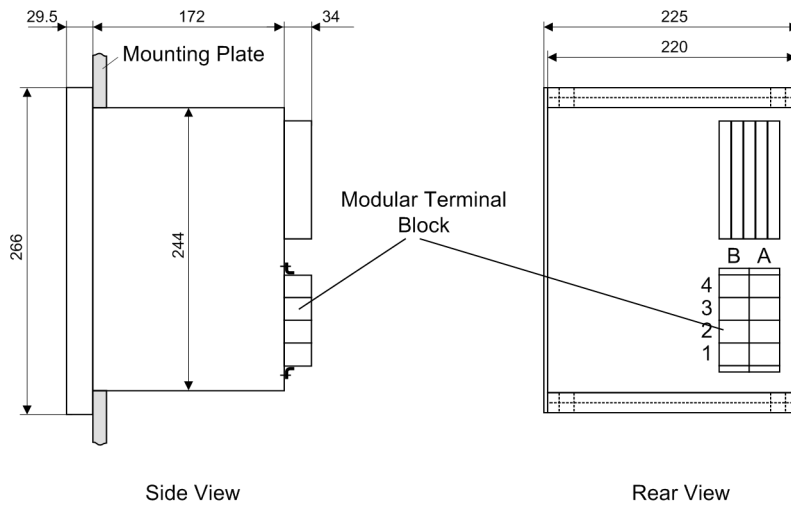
Dimensions of Resistor Unit 7XR6004-0BA00 for Panel Surface Mounting
